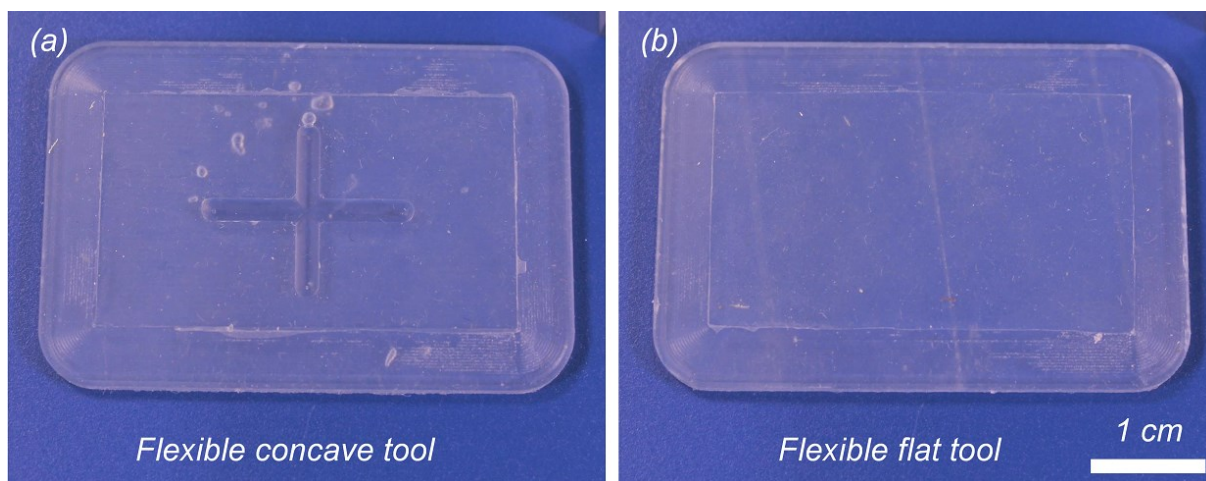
Photos of flexible concave tool (a) and flexible flat tool (b).
